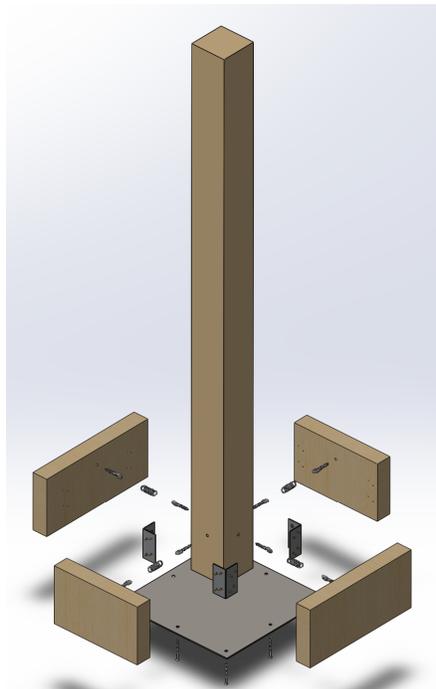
Exploded angled view of the proposed dock deformation mechanism assembly
